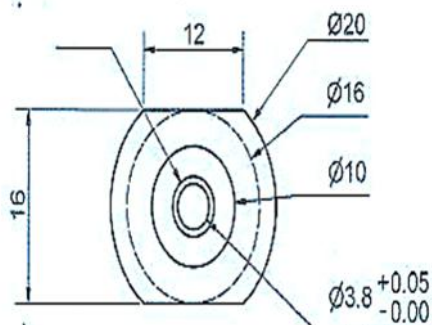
Assembly of Vacuum Ejector - Diffuser Model
